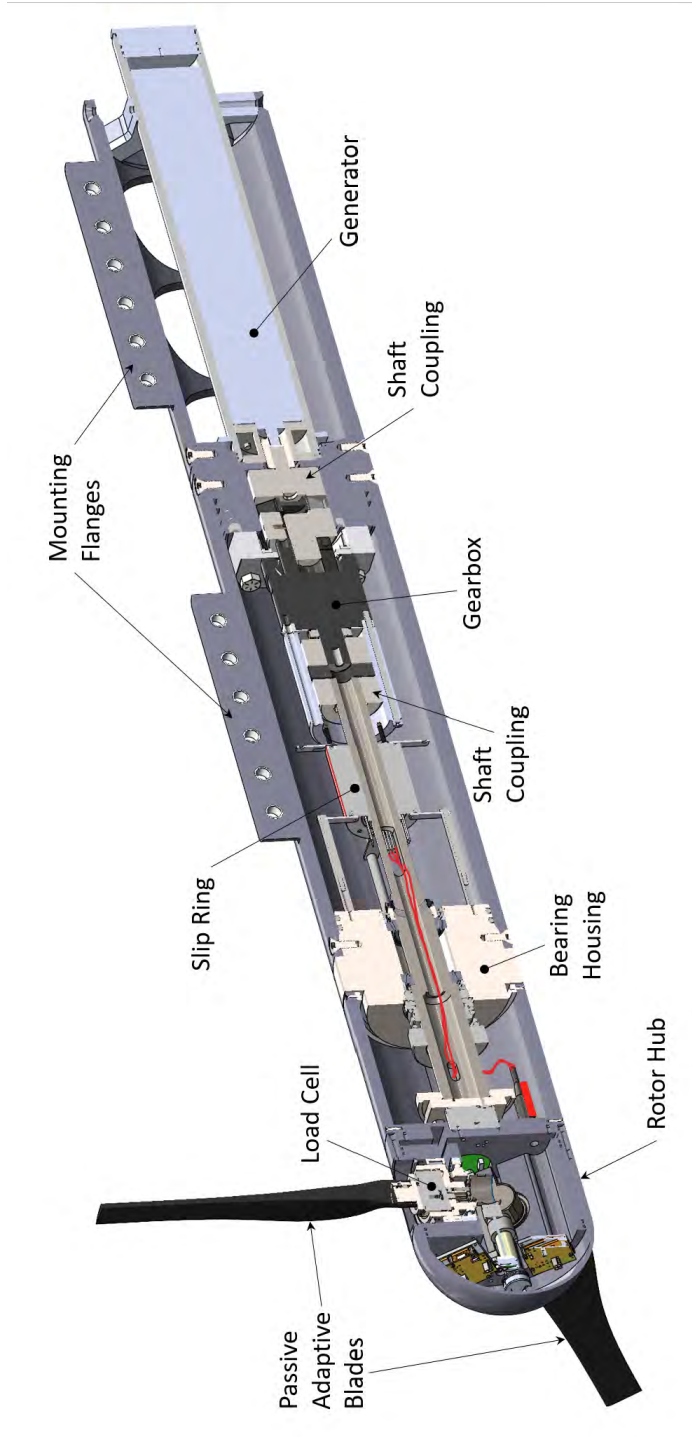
A labeled cross-section of the AFT showing the full assembly and its components. Images of these components prior to assembly are shown in Fig. 7. The red line leading from hub and into the housing with the slip ring, shaft coupling, and gearbox represents the cables transmitting power and data to/from the hub.
